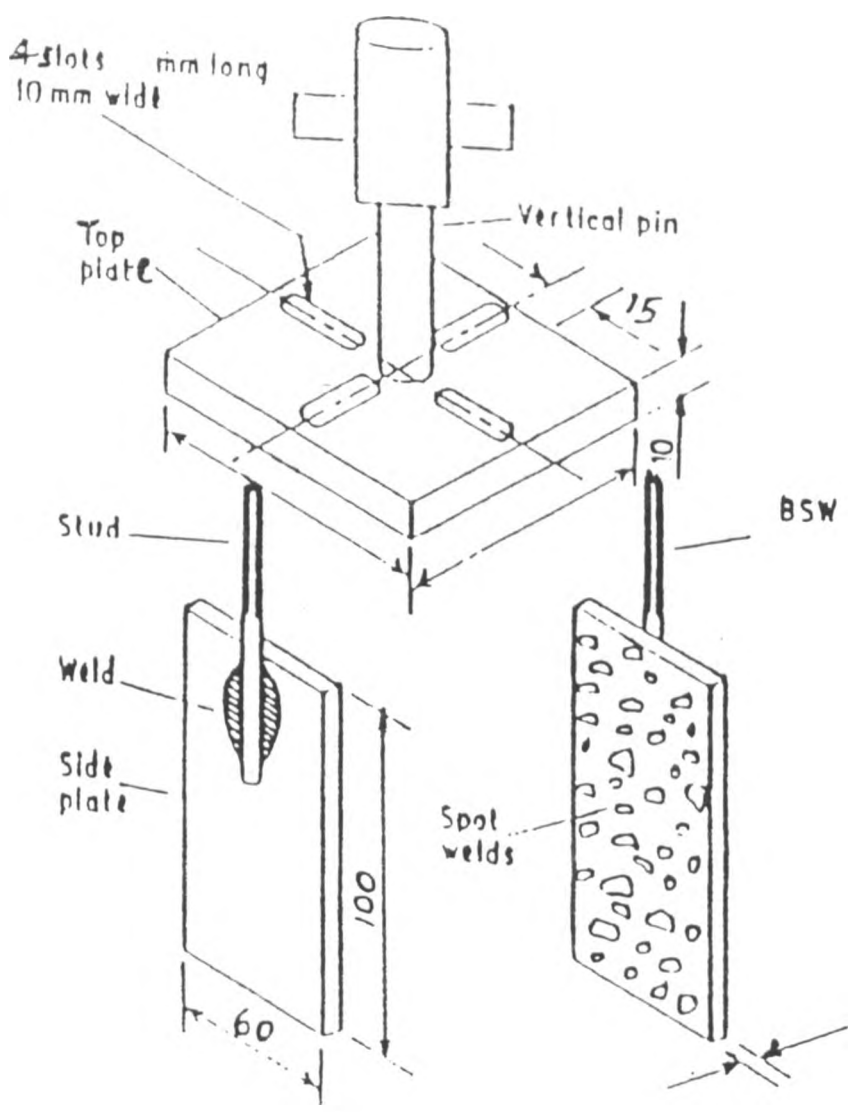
Assembly drawing of specimen grips for tensile test showing two side plates. (all dimensions in mm) (Mutuli, '1982).
